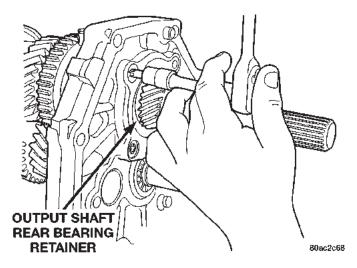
Remove Output Shaft Rear Bearing Retainer
